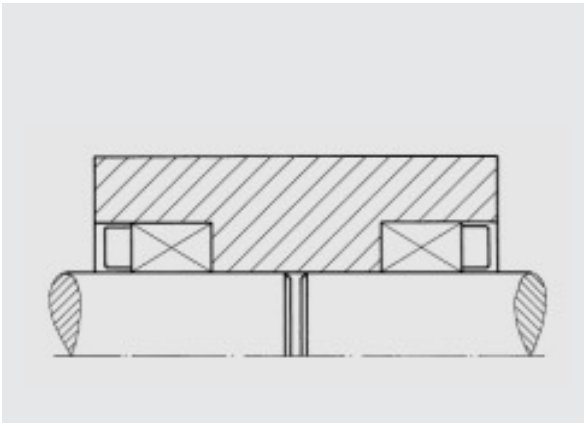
· Connection of two shafts using one Locking Assembly RfN 7012 per shaft. The hub bore need not be stepped; if a through-bore hub is used, it is recommended that a centering ring be fitted to improve trueness of running.
